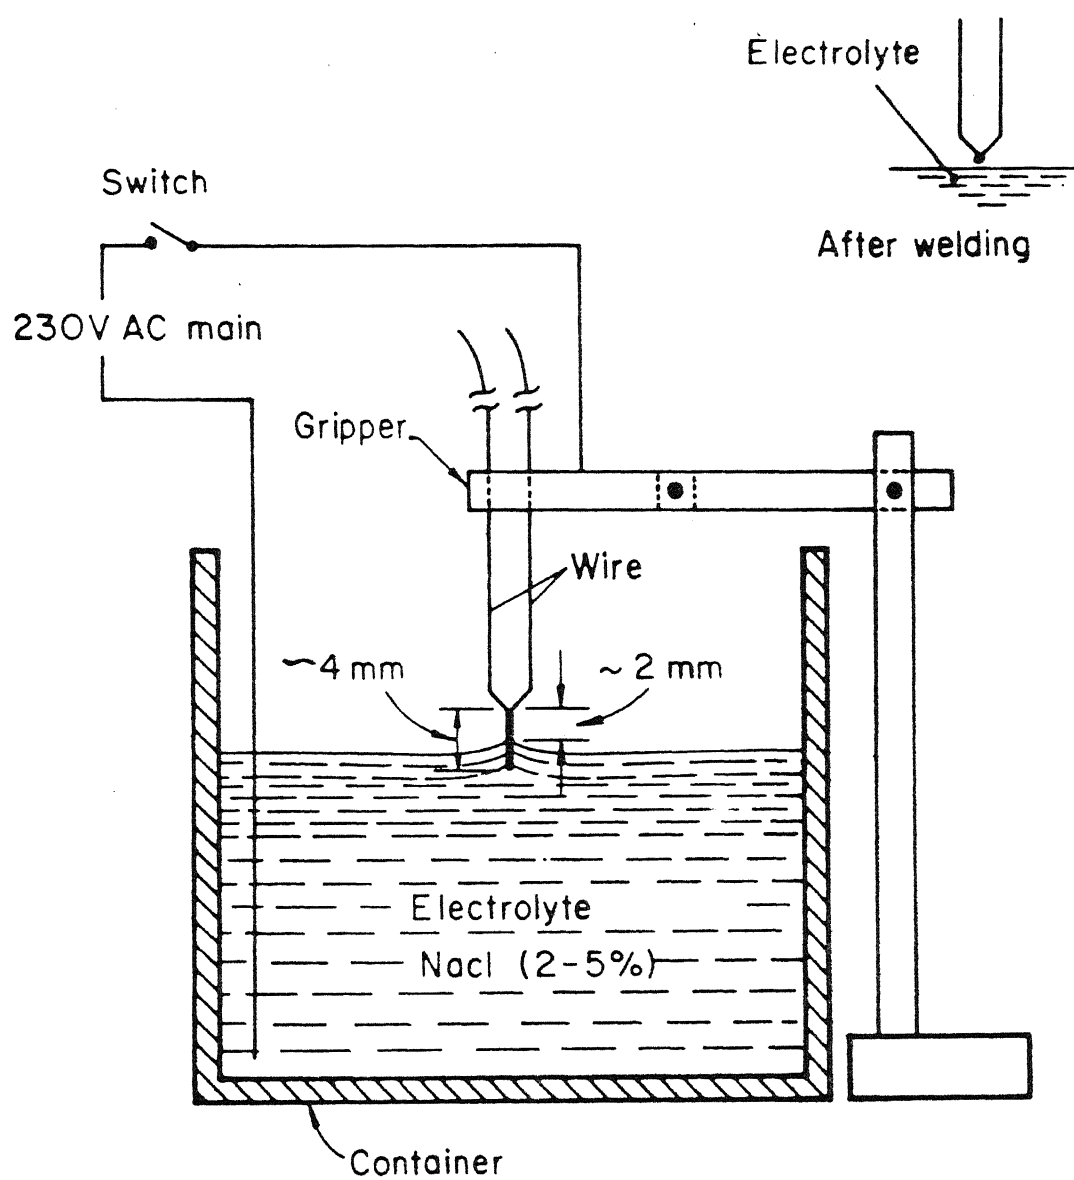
Schematics of micro-welding set-up [1]
